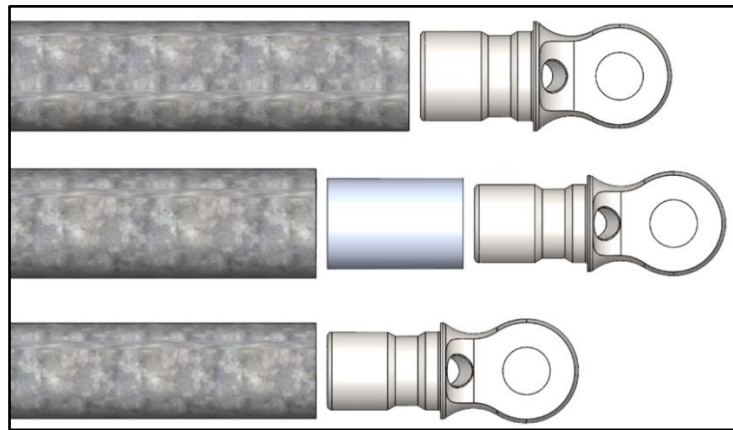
End fitting assembly variants – exploded views. Top: Large fitting in large tube. Middle: Small fitting in large tube with adaptor. Bottom: Small fitting in small tube.
